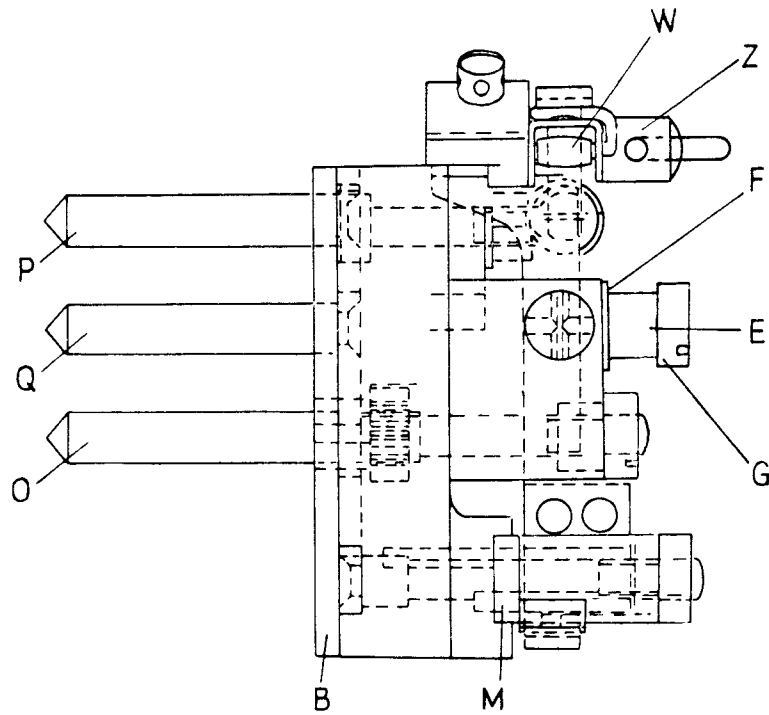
CONTACT BLOCK C.P. (SIDE VIEW)
